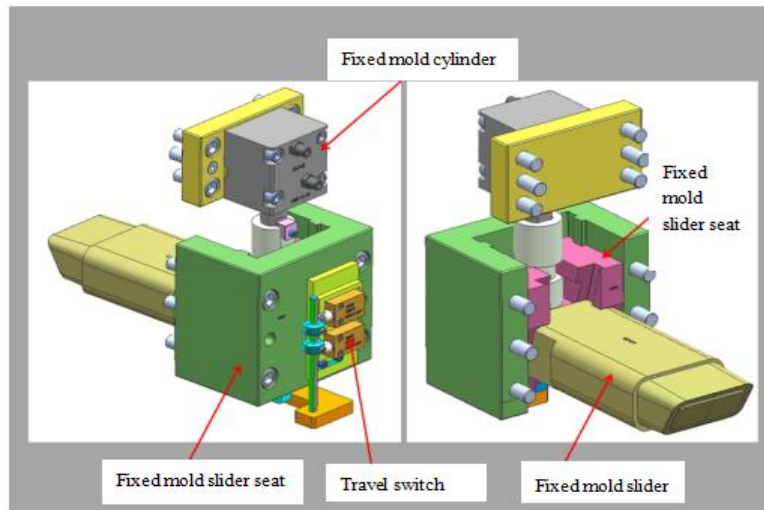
(a) Schematic diagram of the front mold slider core pulling
